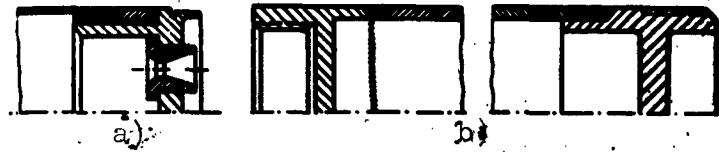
Examples of welded joints in the construction of a rocket missile.
